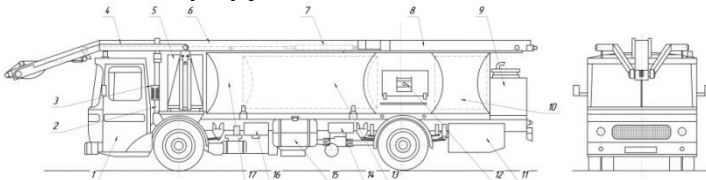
The aircraft deicing vehicle of improved operational performances: 1- Base Chassis Deimler; 2 - Boom Support; 3 – Remote Control Panel; 4 – Extension Boom; 5 – Personnel Carrying Basket; 6 – Main Boom; 7 - Basket Retraction Device; 8 – Boom Suspension; 9 - Auxiliary Engine; 10 - ADF Tank; 11 - Hydraulic Control Unit; 12 - Exhaust Gas Outlet; 13 - Hot Water Tank; 14 - Auxiliary Battery; 15 - Diesel Fuel Tank; 16 - Vehicle Battery; 17 - Heat Chamber.
